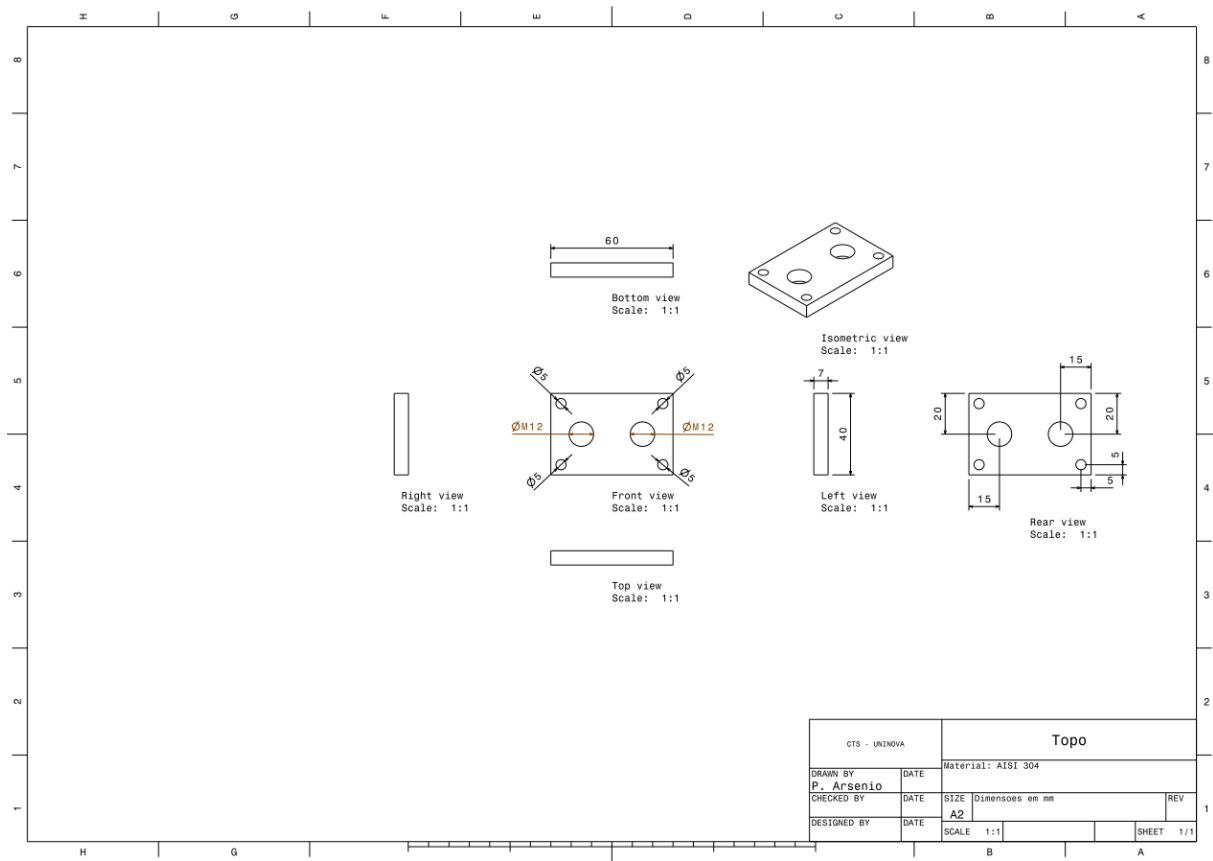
Dimensions, in mm, of the top piece of the stainless-steel holder (not to scale).
